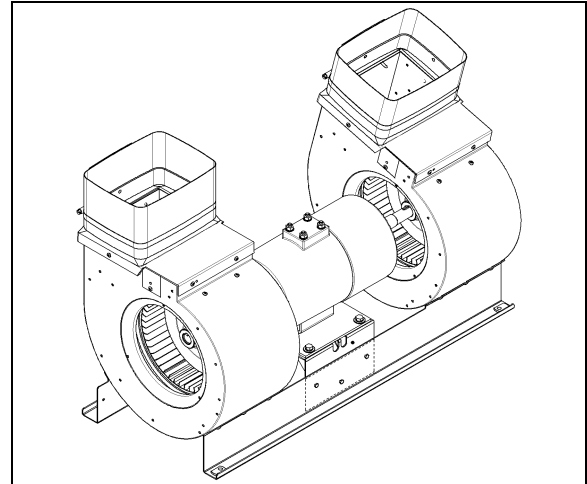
EVAPORATOR MOTOR ASSEMBLY 22316
